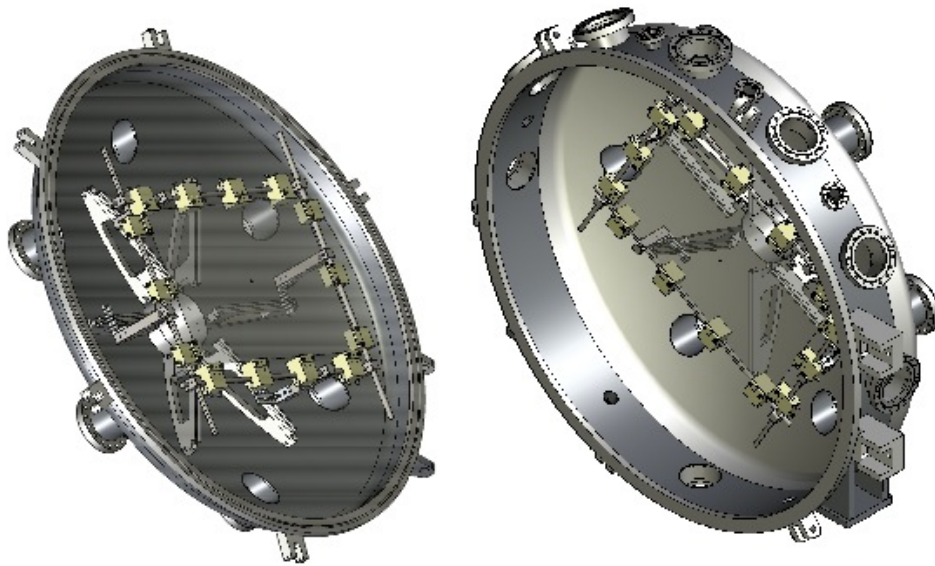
Mechanical drawing of the clamping method that allowed for easier modification of the carpet electrodes without having to redo the clamping process. The carpet electrodes are represented by the opaque grey rectangular sheets. Left: Frame on the door side. Right: Frame on the chamber side.
